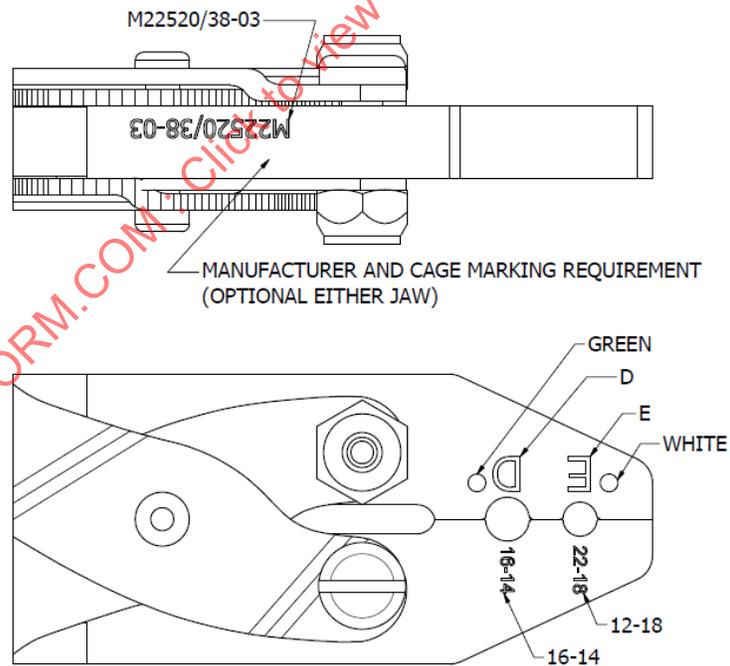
M22520/38-03 TOOL MARKING REQUIREMENTS
